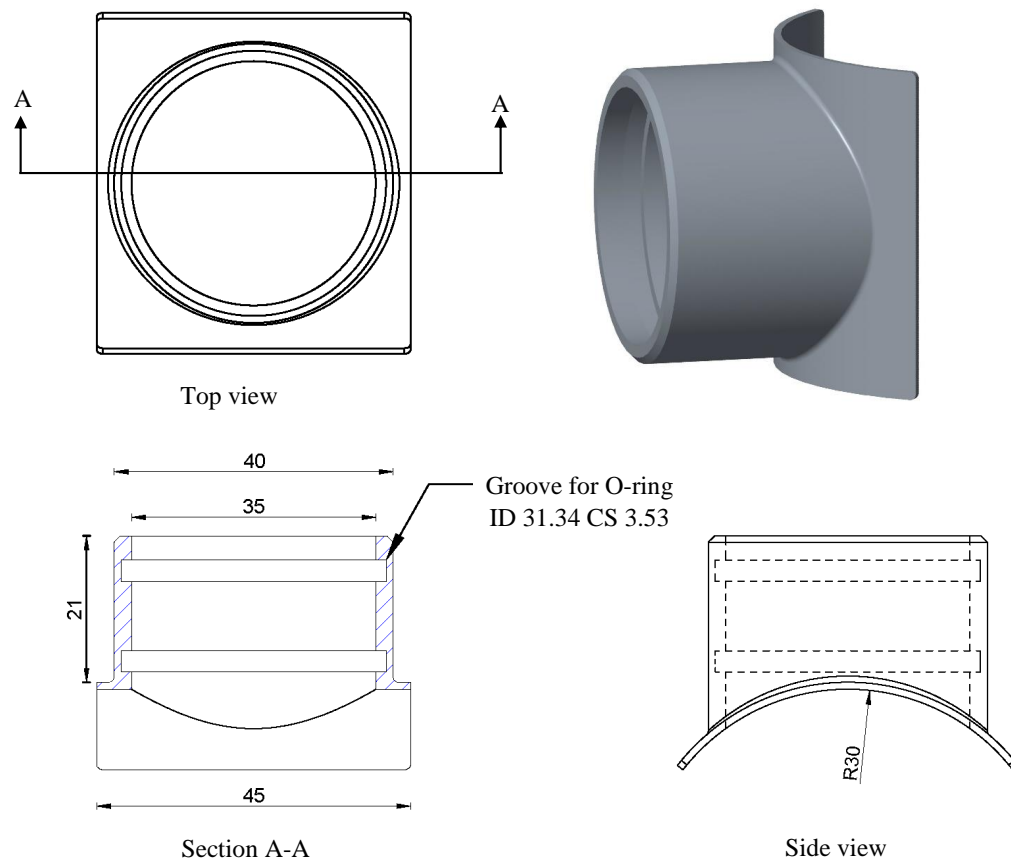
Inlet pipe supporter with O-ring grooves.
